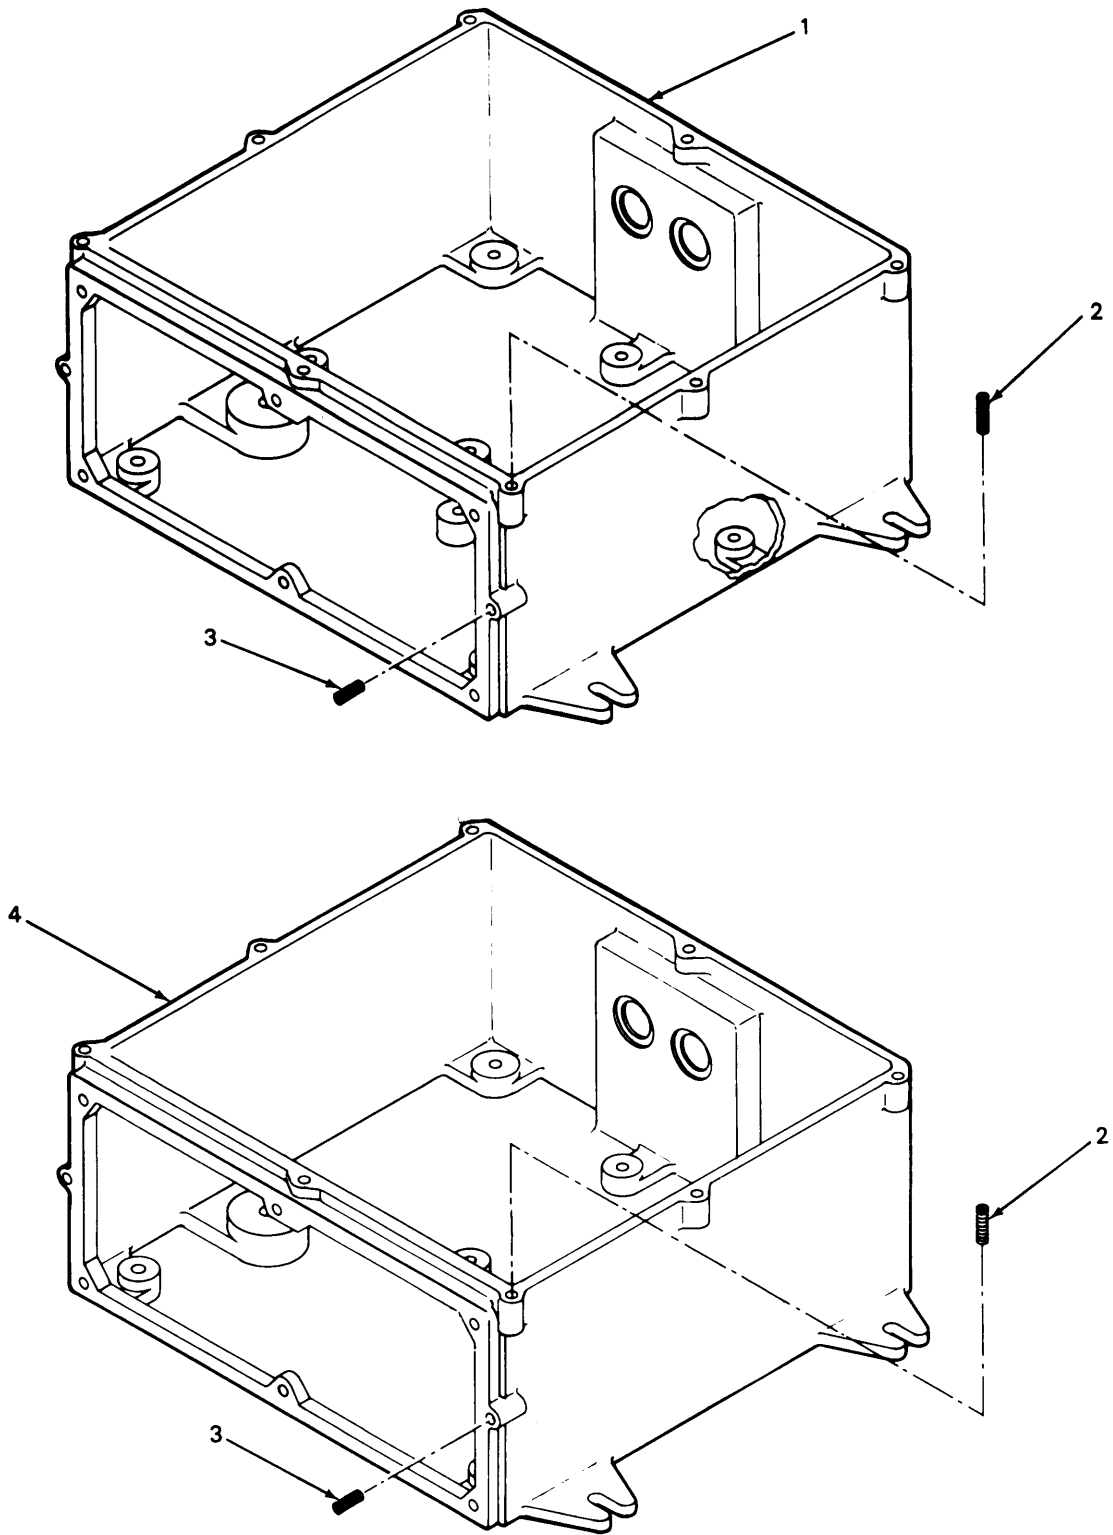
Front Panel Assembly (A3) (Sheet 3 of 3)
